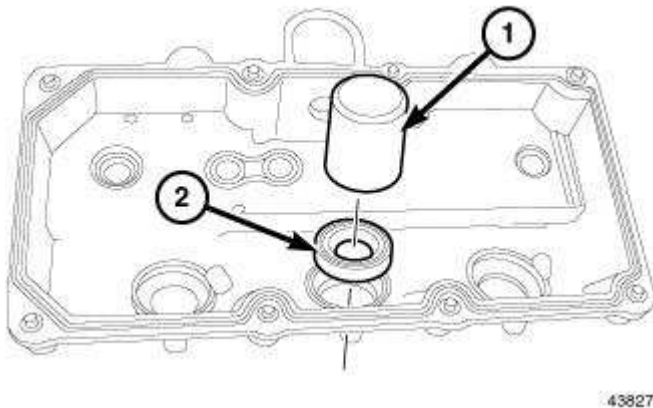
Cylinder Head Cover Gasket and Spark Plug Tube Seals
